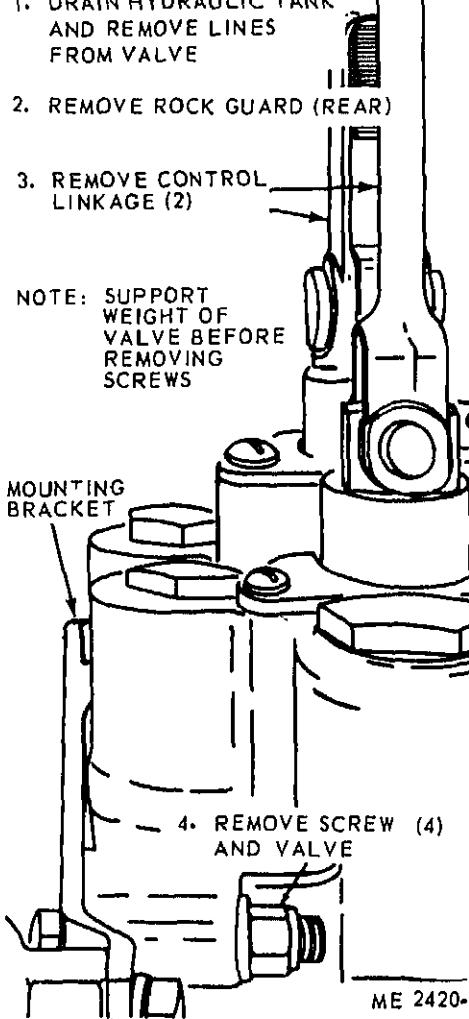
Bulldozer hydraulic valve, removal and installation.
